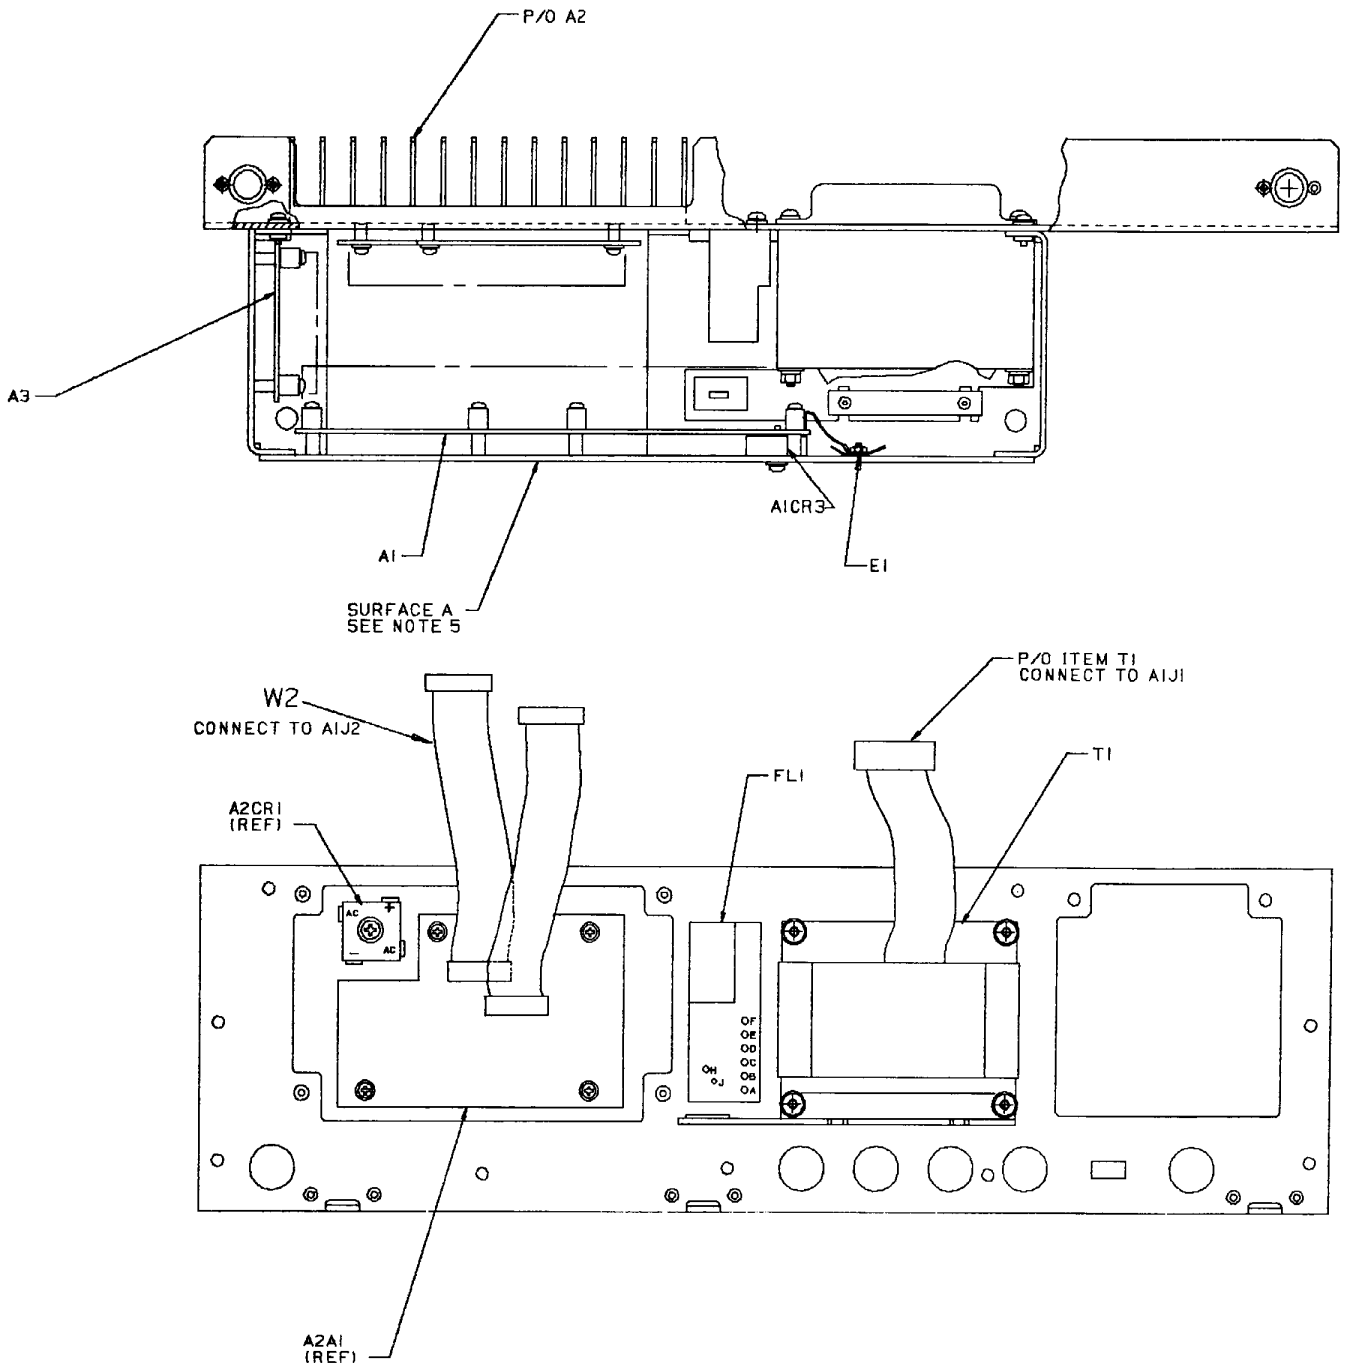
Power Supply Assembly A15 Component Location Diagram (10073-3000, Rev. J)
